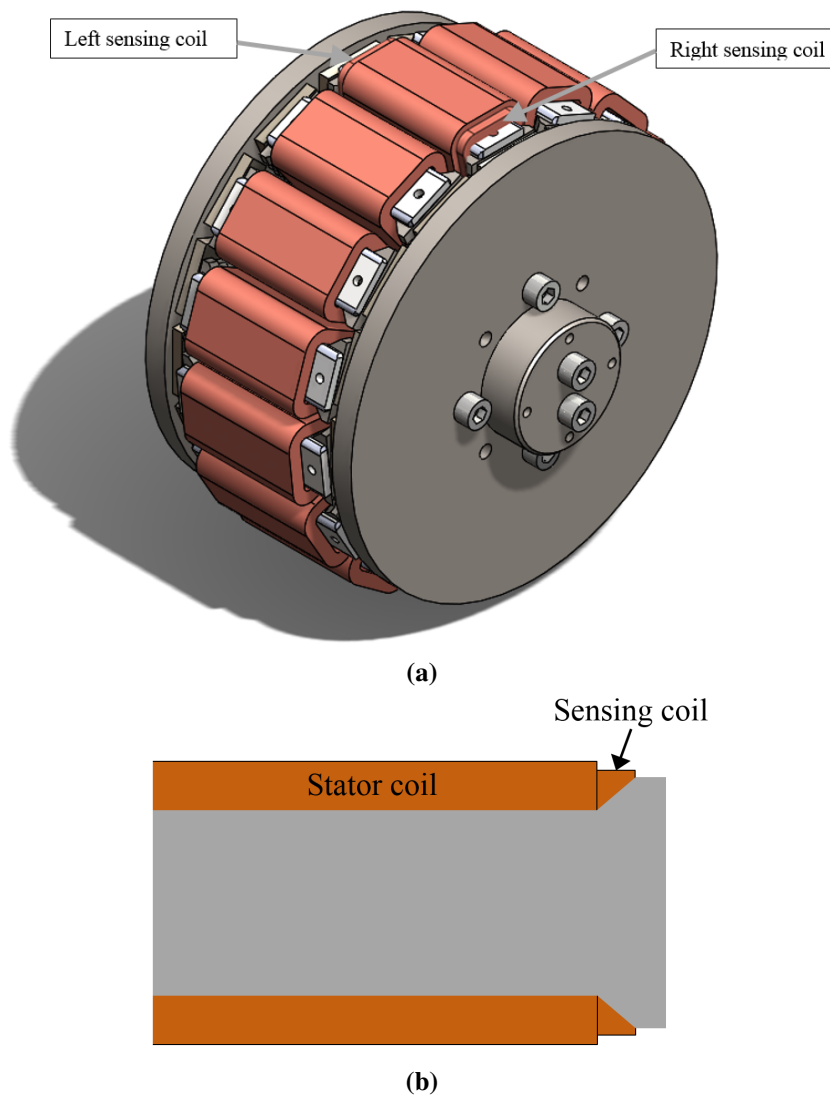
(a) The machine setup including the minimum required amount of sensing coils: one for each air gap [224]. The shown machine is the single-stator double-rotor YASA AFPMSM with 3 phases, 8 pole pairs and 15 stator coils explained in Section 3.5, and (b) a cross-section of the tooth with the sensing coil at the right air gap.
